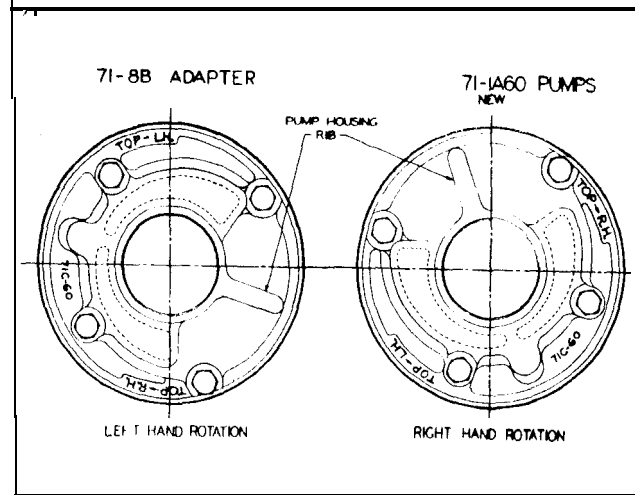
Orientation Markings for New 71-1A60 Pump Assembly on 71-8B Adapter
